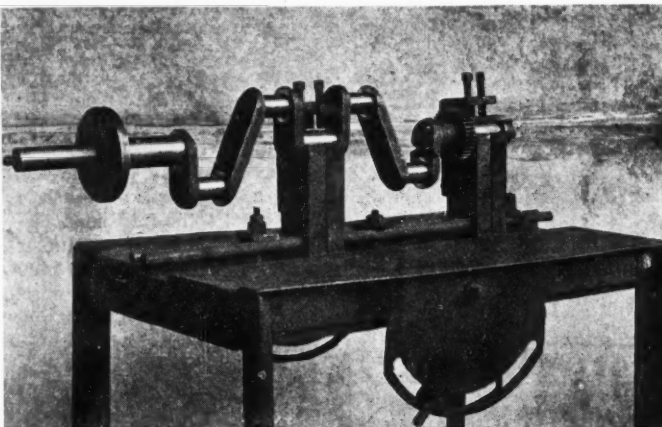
Break properly V'd and crankshaft lined up in jig table
